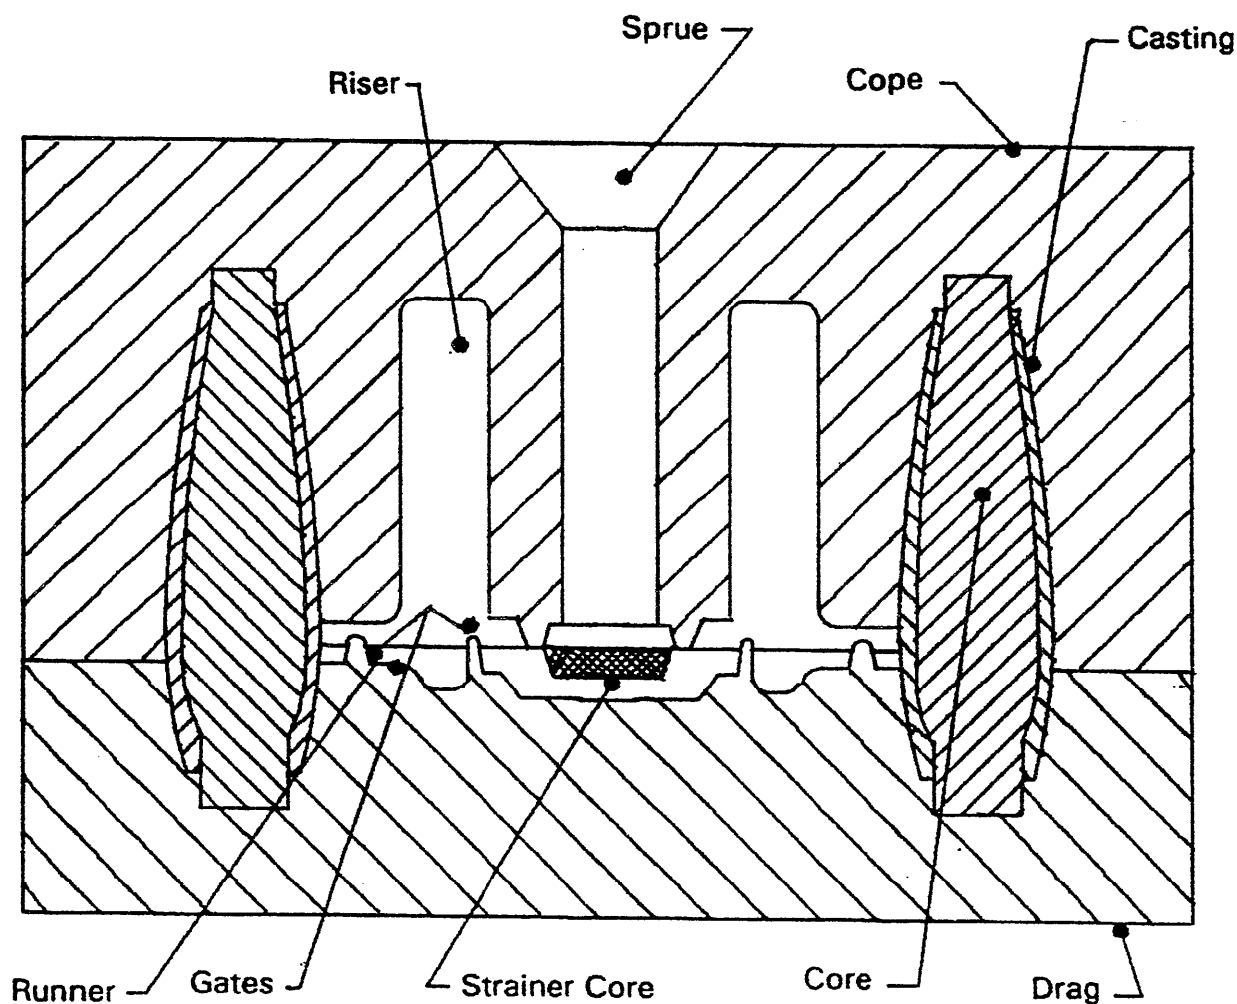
Cross Section of a Sand Mold for Casting Projectile Bodies
